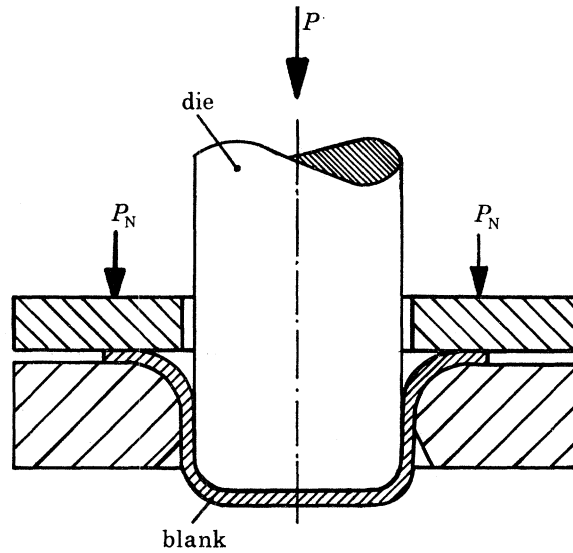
Arrangement for deep drawing of a circular sheet-blank.
